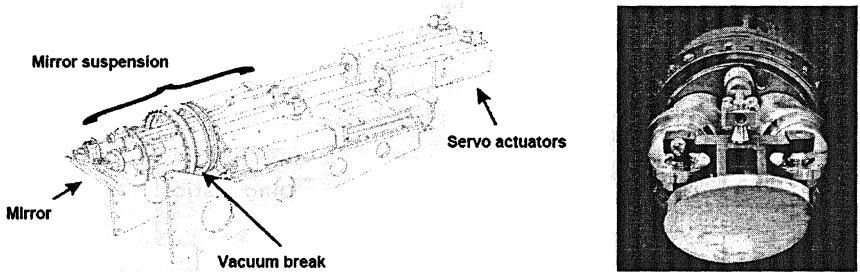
A schematic view of the TEXTOR ECRH launcher (left) and a picture (right) showing the in vessel mirror with bearings (adapted from Ref. [14]).
